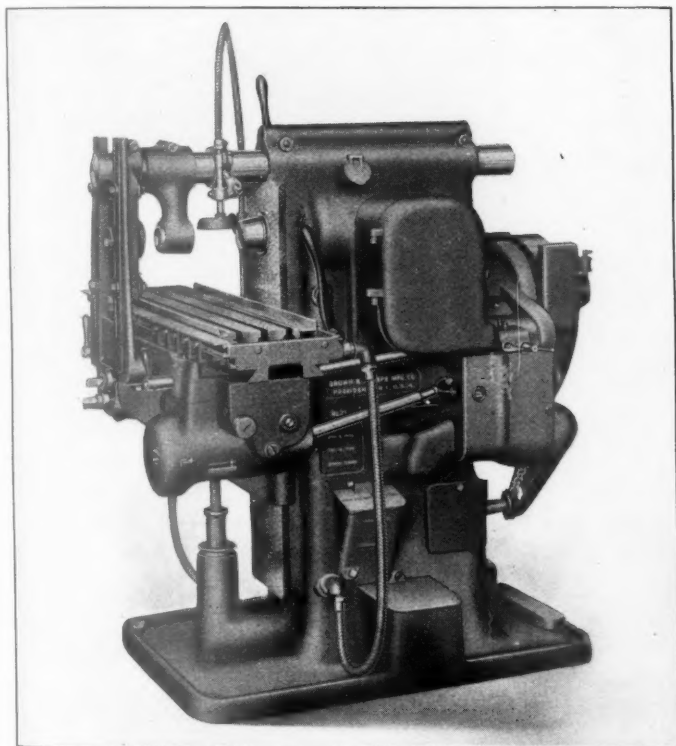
Brown & Sharpe No. 21 Automatic Milling Machine
